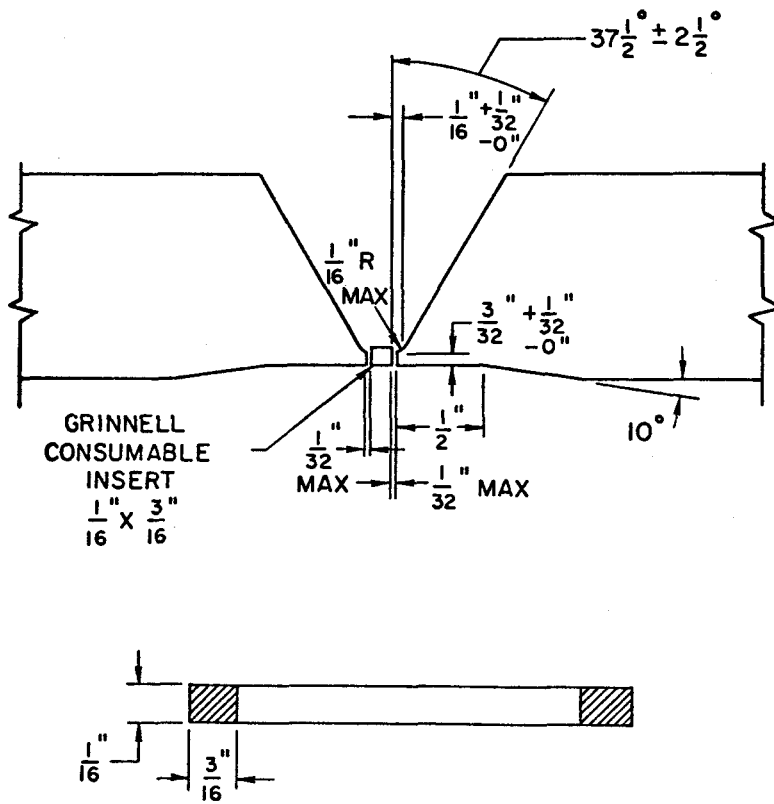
Weld-prep Geometry. To convert dimensions to mm, multiply by 25.4. Neg. No. MSD-63927.
